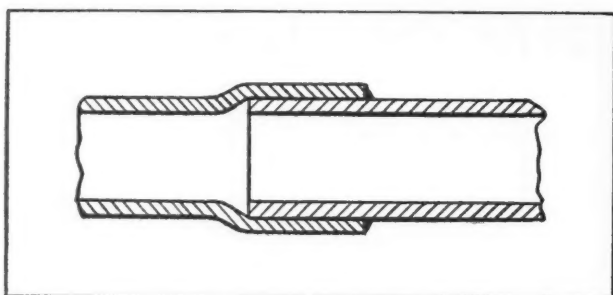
Where hydraulic pressures are relatively low, soldered tube joints may be used to form a simple connection
